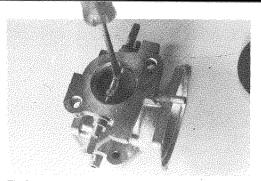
Using the new screws provided, attach the disc to the spindle. Firm pressure is required, but be careful not to strip the threads from the relatively soft brass of the spindle.
